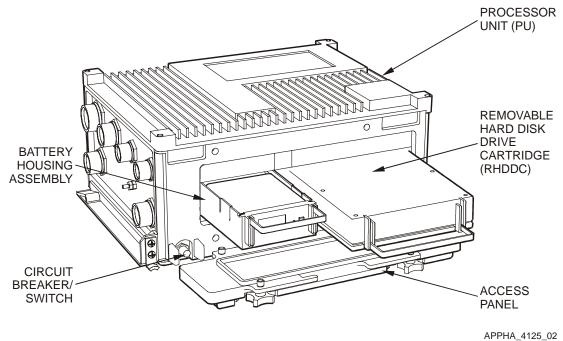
Remove/Replace Battery Housing Assembly for PU NSN 7021-01-474-3793/NSN 7021-01-487-0578
